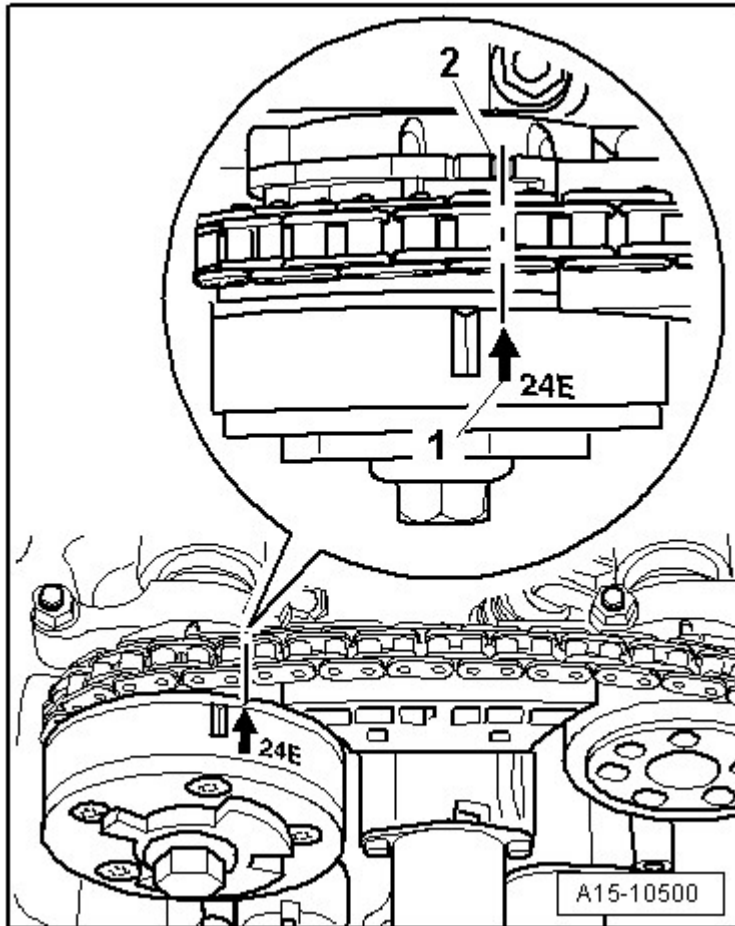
Verifying Installation Marks Of Intake Camshaft Adjuster With Marks On Control Housing
